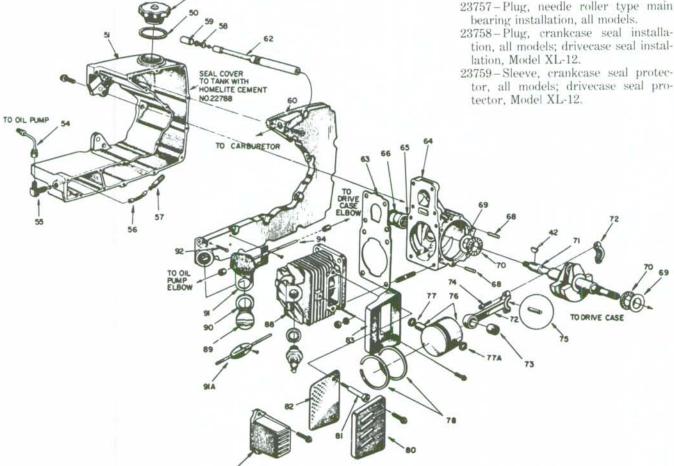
Exploded view showing power head and fuel tank construction of Model XL-12; refer to Fig. HL35 for Model Super XL Automatic. Dowel pin (68) are used on later models. Refer to text. Single or two-piece muffler may be used. Shield (91) is not used on later models.
